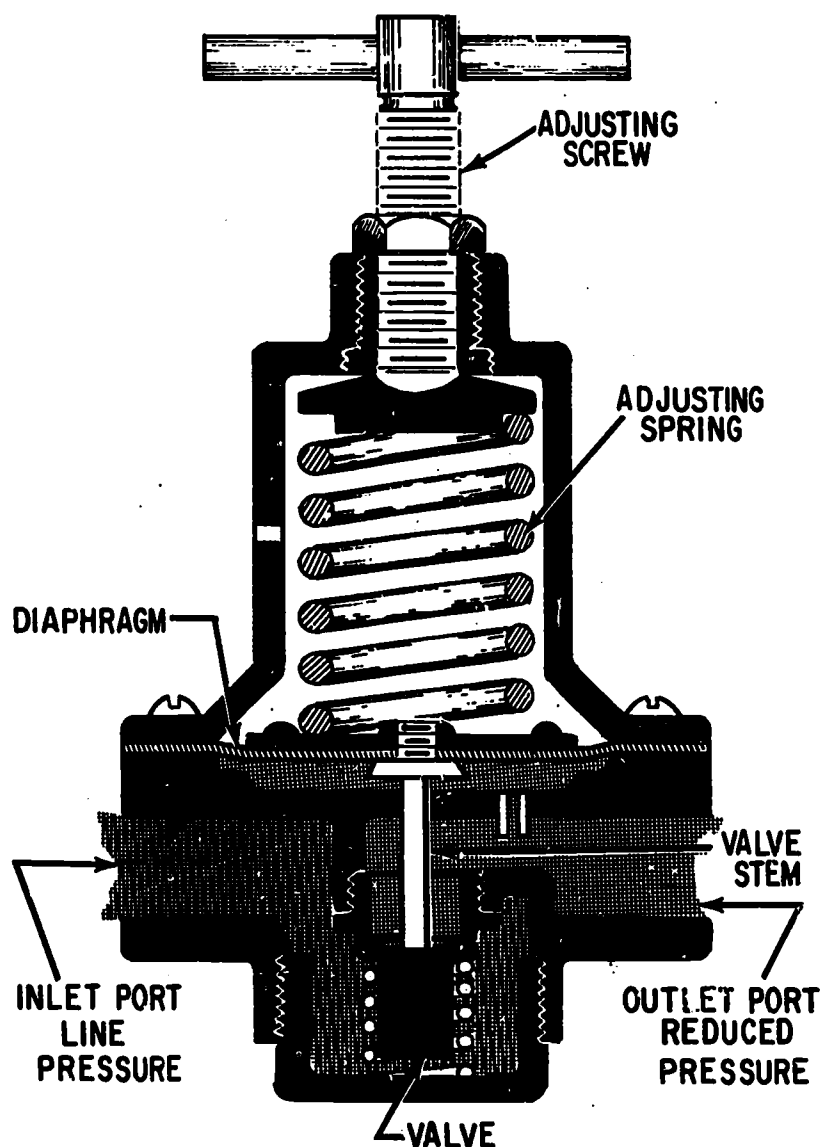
Diaphragm-controlled pressure reducing valve.
